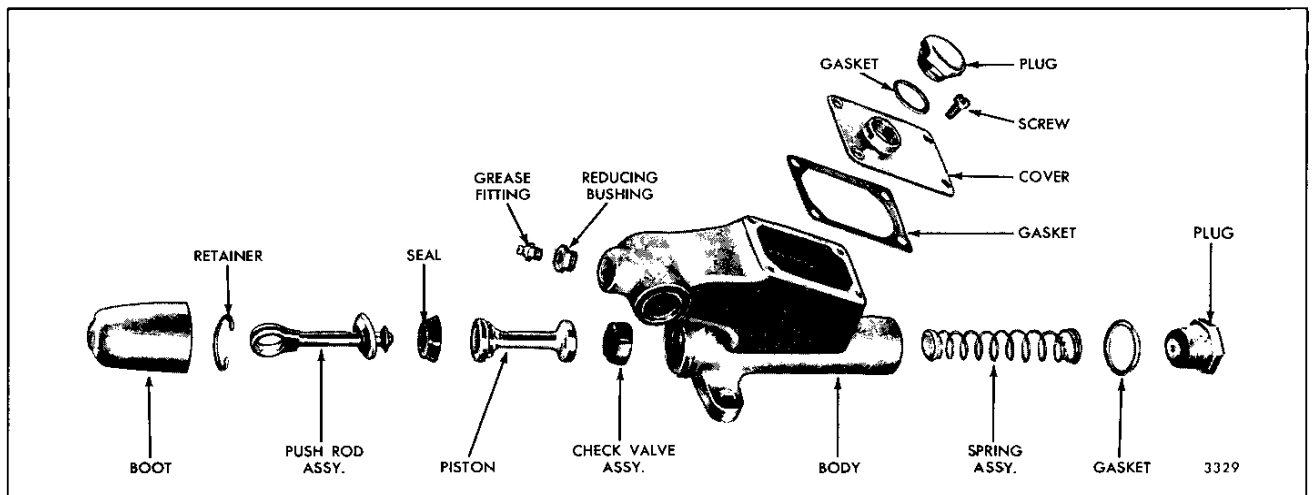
Hydraulic Starter Remote Control Master Cylinder Details and Relative Location of Parts
